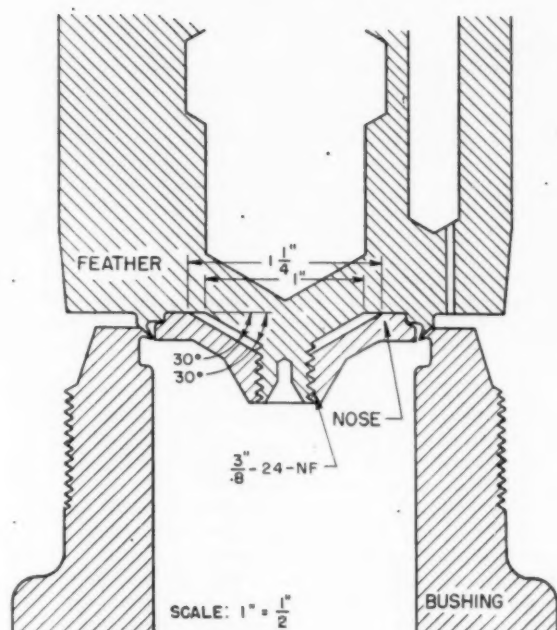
ASSEMBLY DRAWING OF NEW-DESIGN VALVE SEAT
